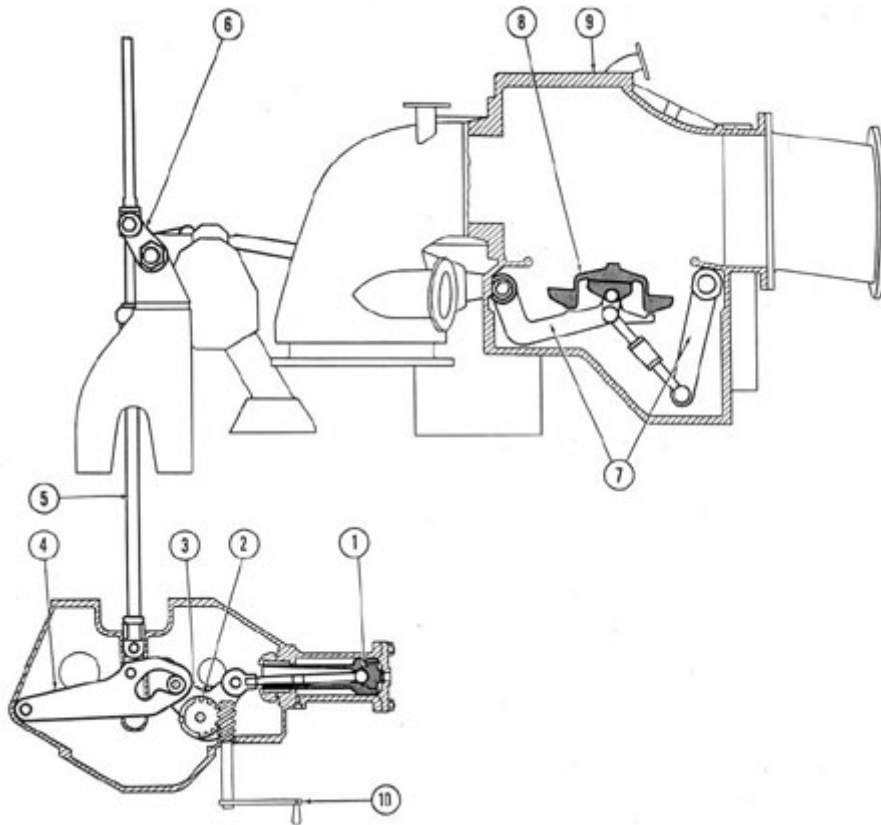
Diagram of main engine drowned-type exhaust valve operating gear and hydraulic cylinder, OPEN.
